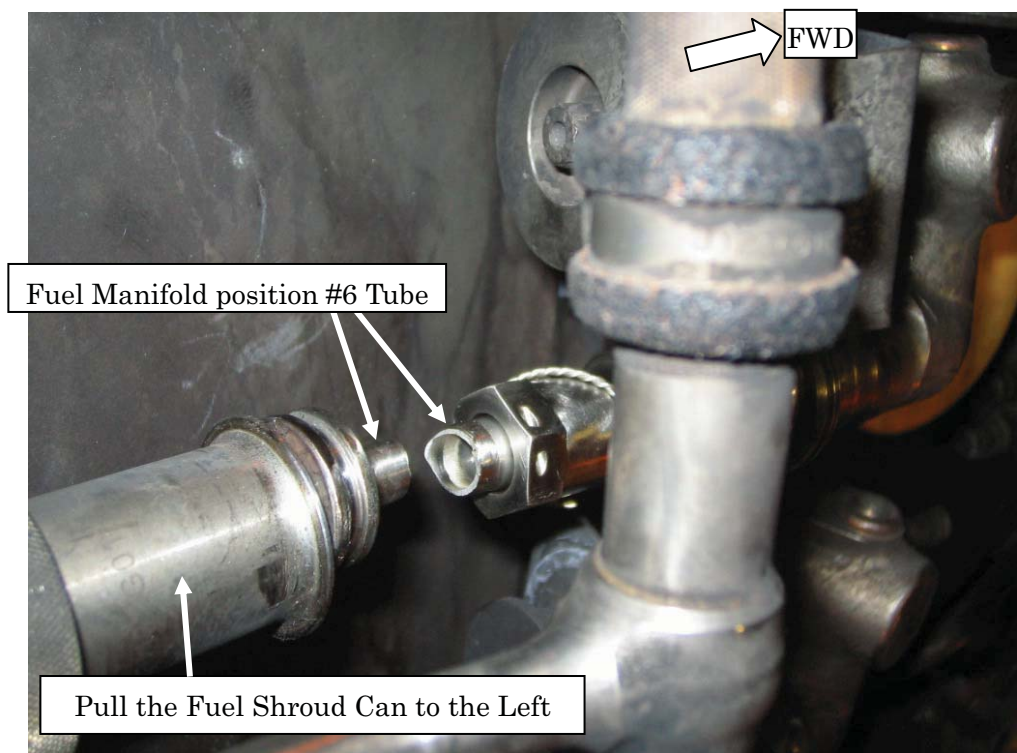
Fractured Surface of Fuel Manifold Position #6 Tube
